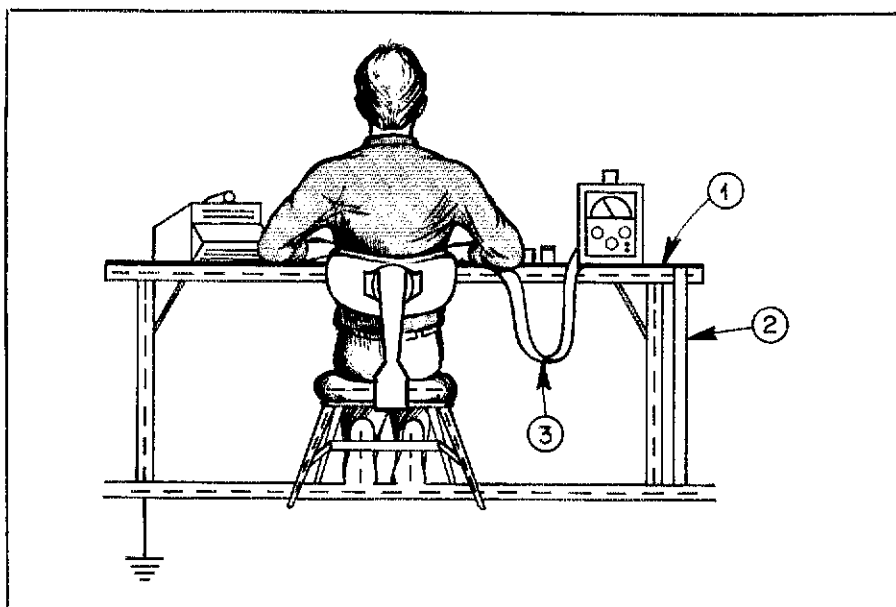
Typical ESD-safe work station. At 1, a 1/16-inch conductive sheet stock covering bench-top work area. At 2, strap to earth ground. At 3, grounded wrist strap in contact with skin.
